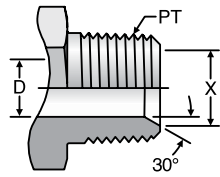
Illustration showing how NPSM swivel adapters seal on mating chamfer in male pipe thread
